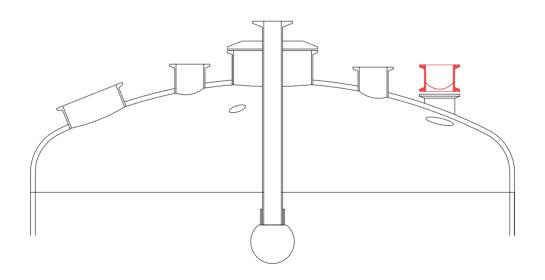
Test Vessel Head in Section with Rupture Disc in Position (Red)
